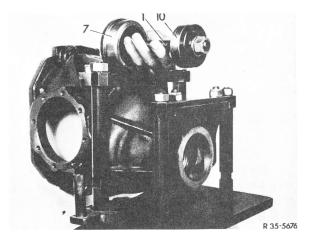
1 Installation tool 116 589 11 61 00 7 Rear bearing outer race
